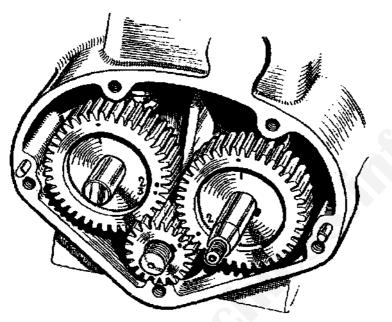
VALVE-TIMING MARKINGS FOR 1954-55 ENGINES.
